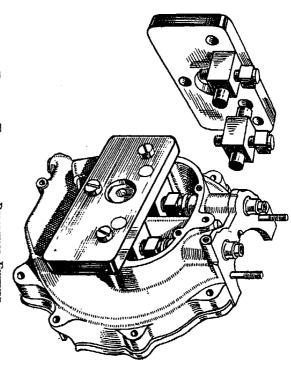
TAPPET-GUIDE REMOVING FIXTURE.
